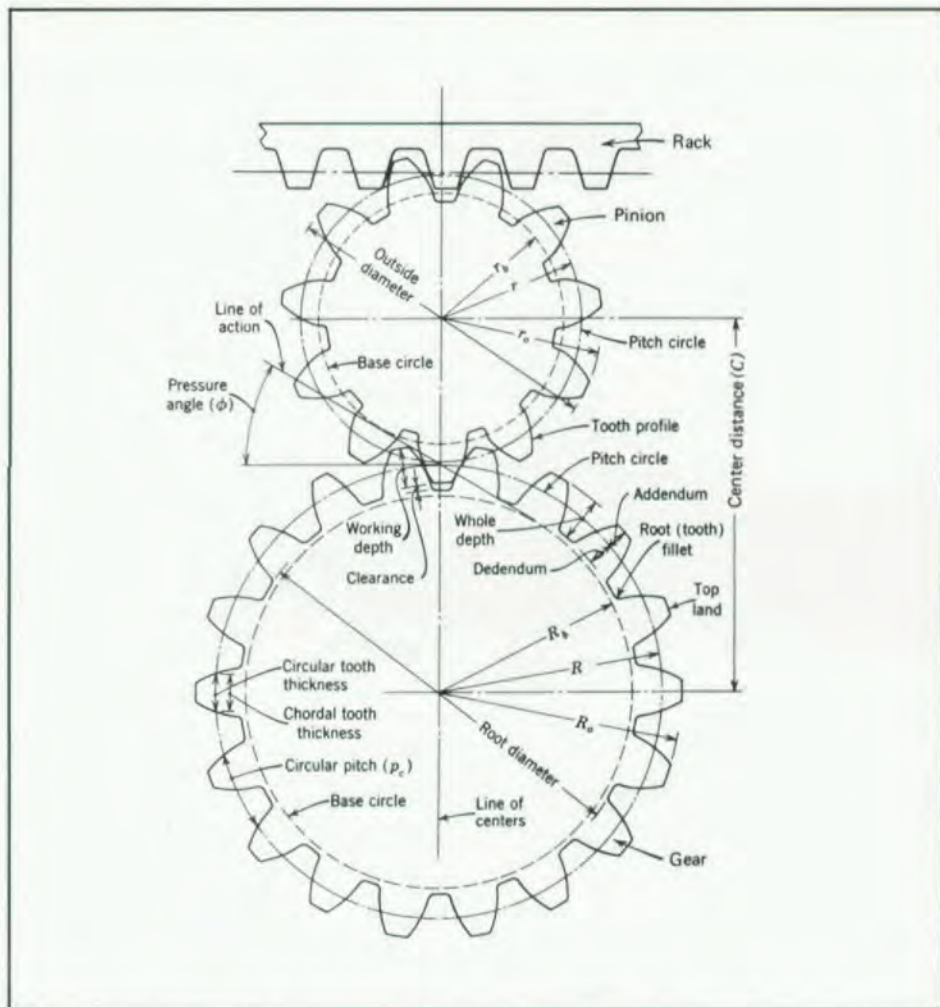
Spur gear geometry. (G. W. Michalec, *Precision Gearing*, Wiley, 1966.)
